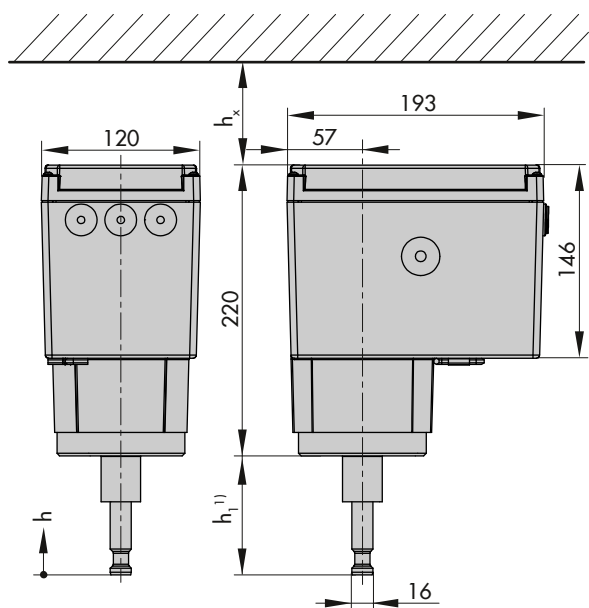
Dimensions in mm · Type 3374-10, -11, -21 and -31, version with integrated yoke (form B)
